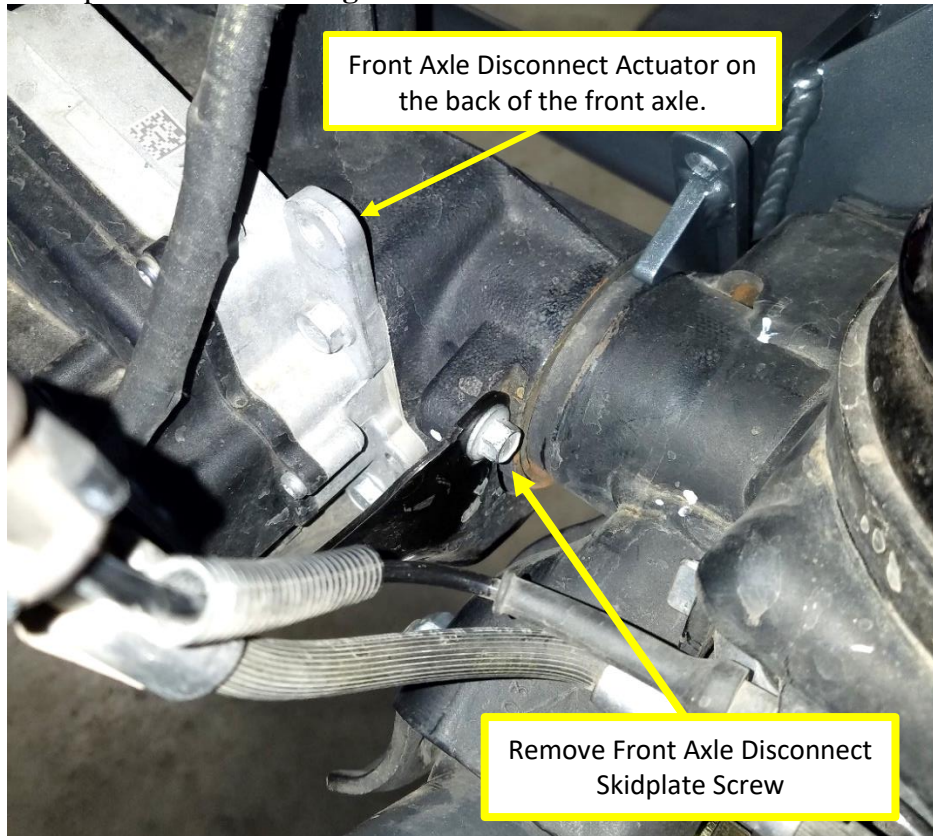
Temporarily Remove the Front Axle Disconnect Skidplate Screw
